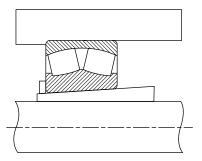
Spherical roller bearing mounted with an adapter sleeve.
